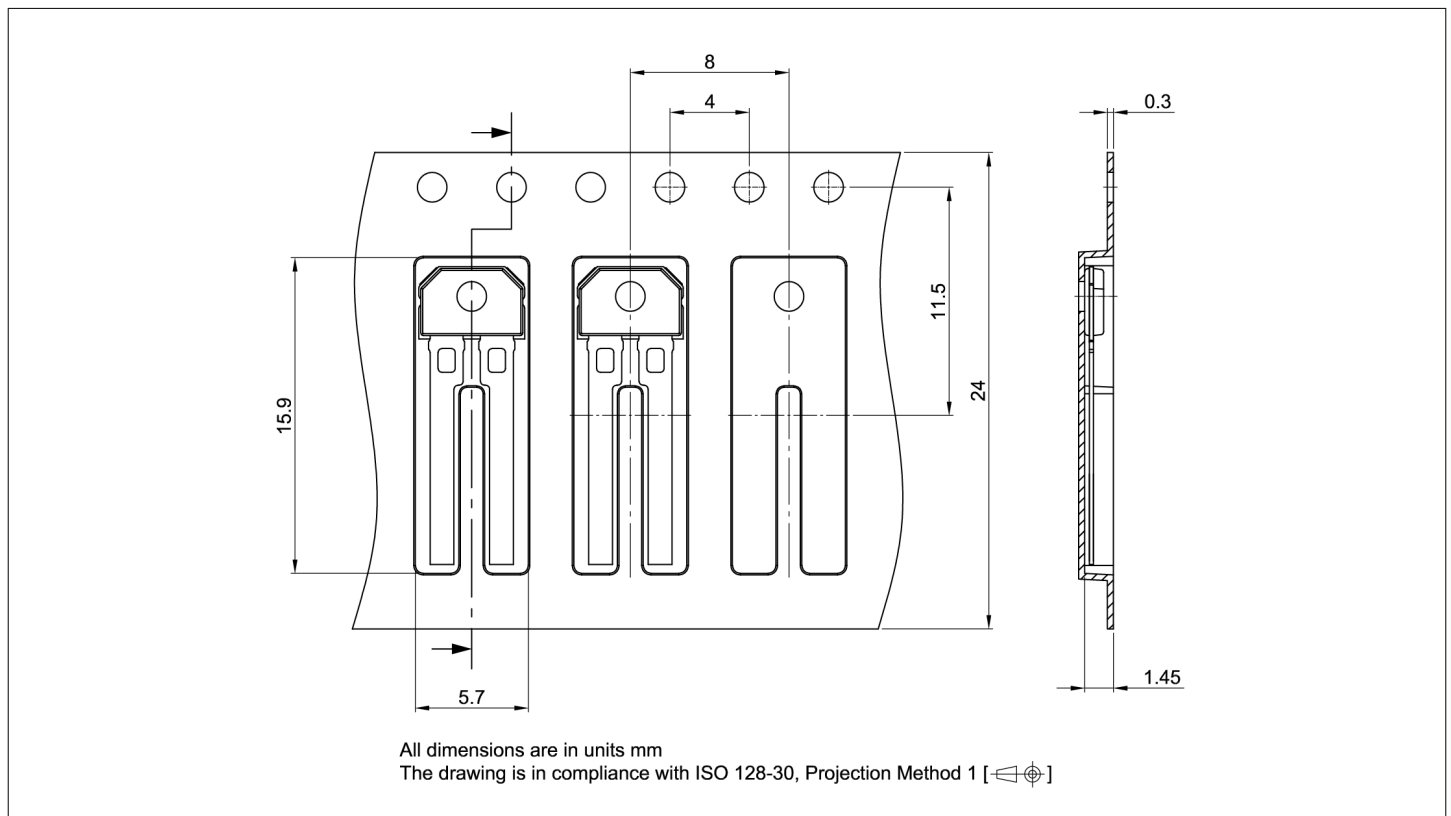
Packing dimensions of PG-SSO-2-51 in blister packing
